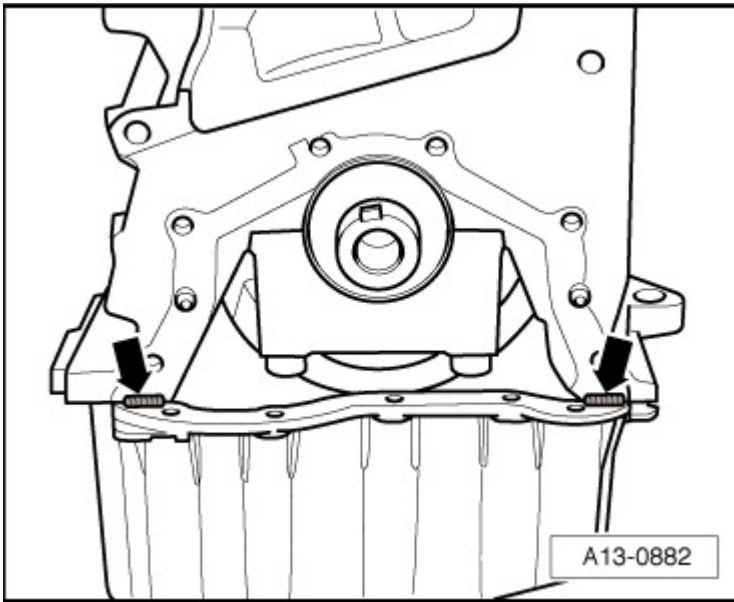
Applying Thin Bead Of Sealant To Edge Between Cylinder Block And Oil Sump
